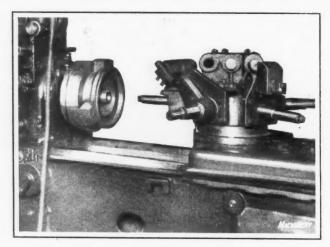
Tooling for finishing Internal Surfaces of Clutch Case
